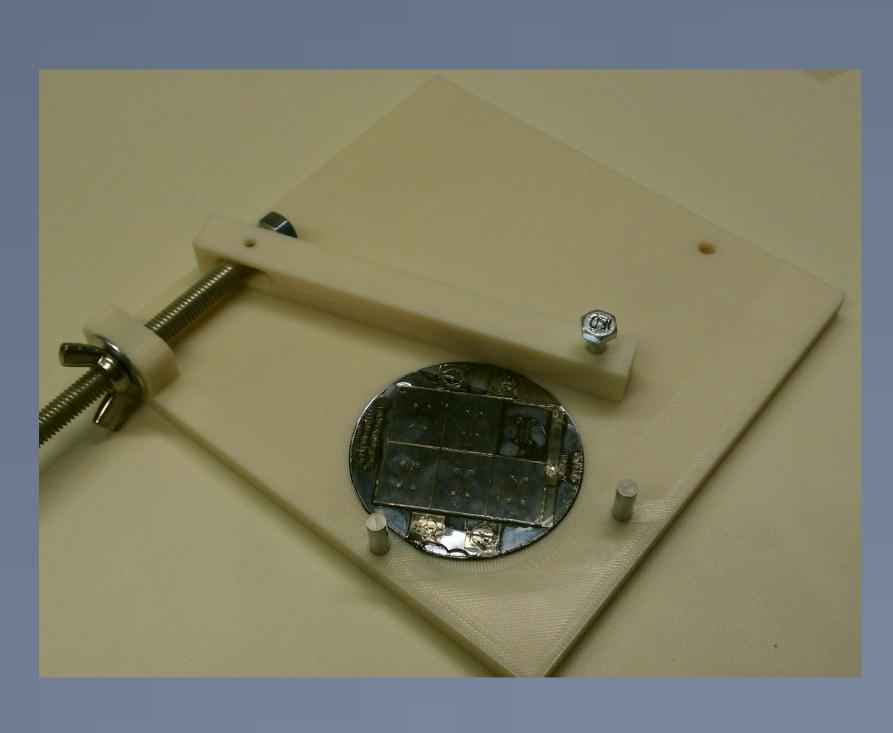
Initial prototype made with rapid prototype assembly as well as store-bought hardware
